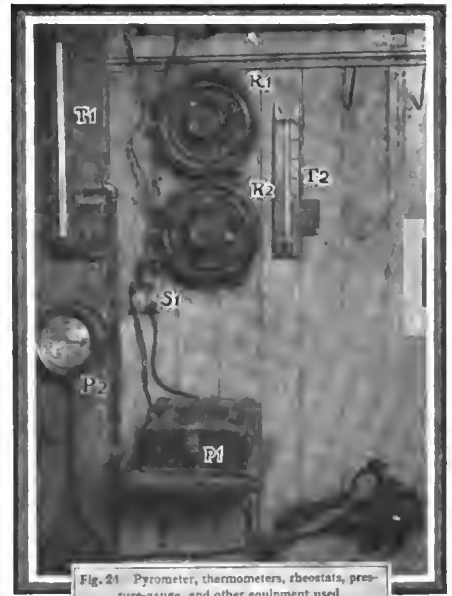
Pyrometer, thermometers, rheostats, pressure-gauge, and other equipment used in heat treating Diamond chains
